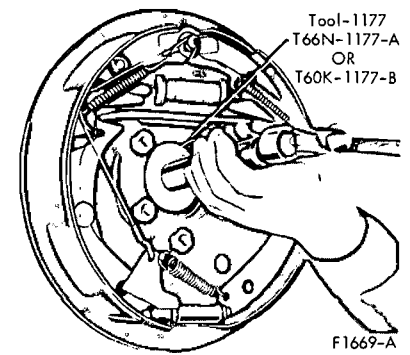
Installing Rear Wheel Bearing Oil Seal
